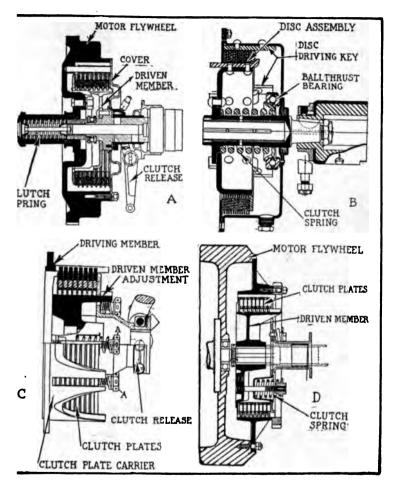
Group Showing Multiple-Plate Clutches Used on Modern Automobiles.
